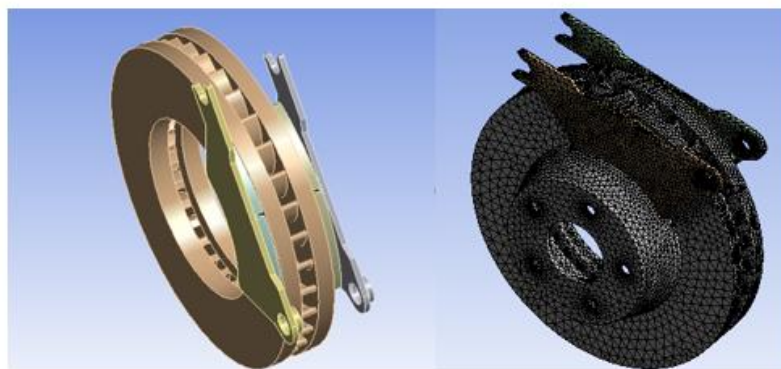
Left: Brake disc and Pad assembly Right: Meshed assembly
